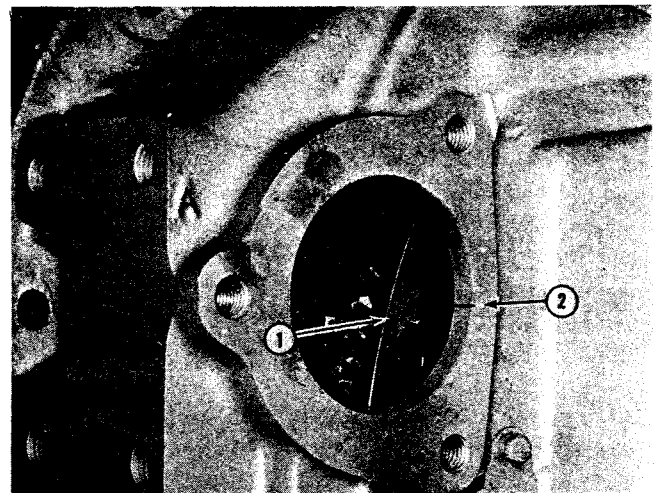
, (K21918). Valve set marks on right bank flywheel and housing — KT(A)-2300
